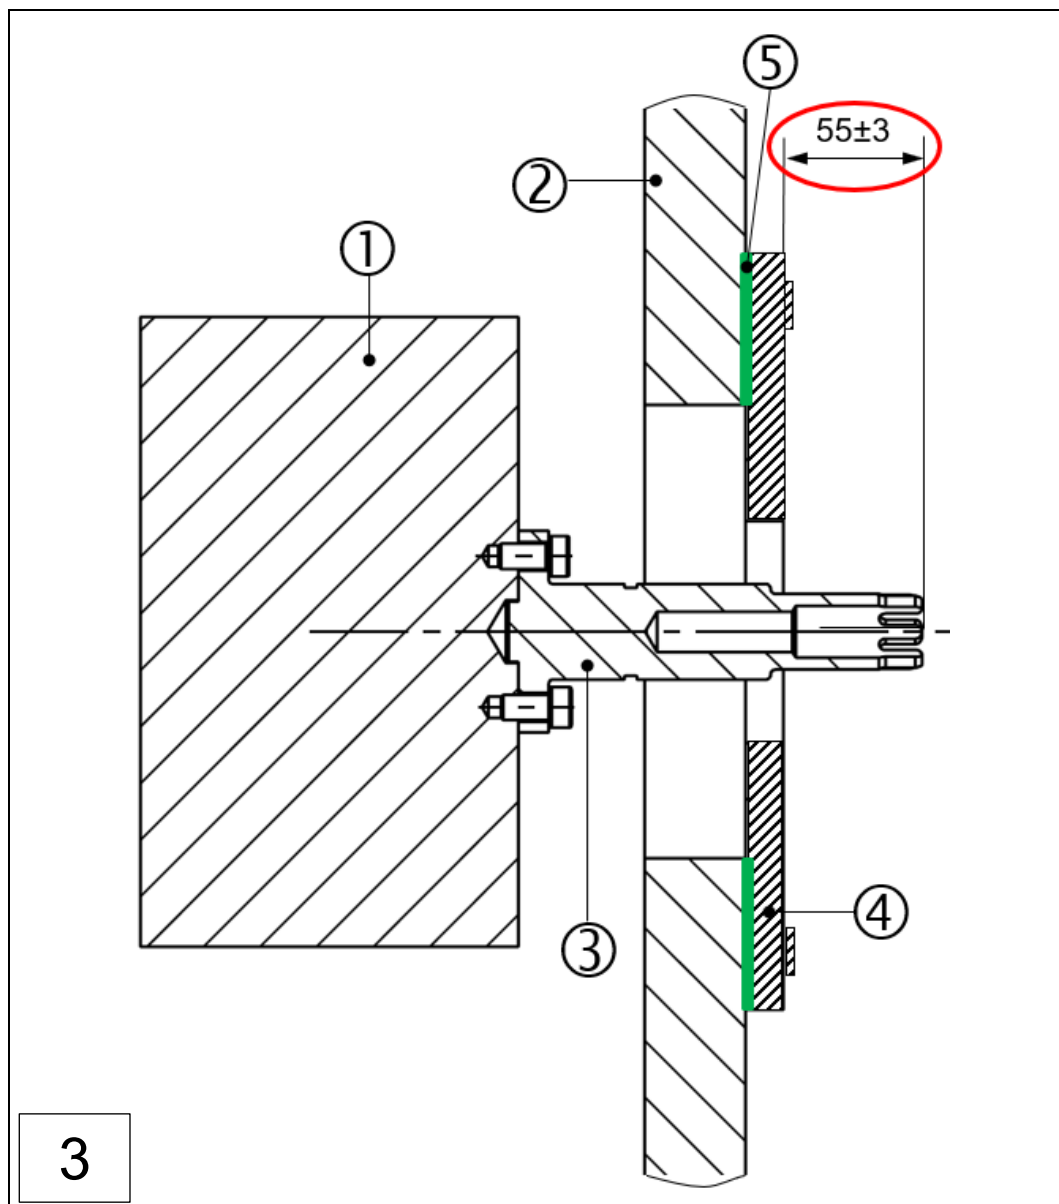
Aligning the BEAROMOS® 2020 crankshaft seal system
